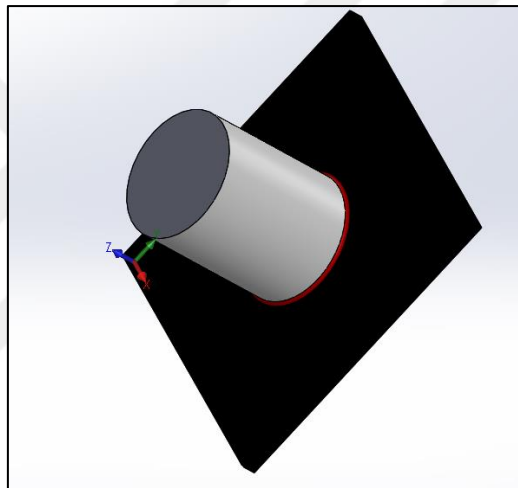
Case 1 - Model of Cylinder Welding on Base.
